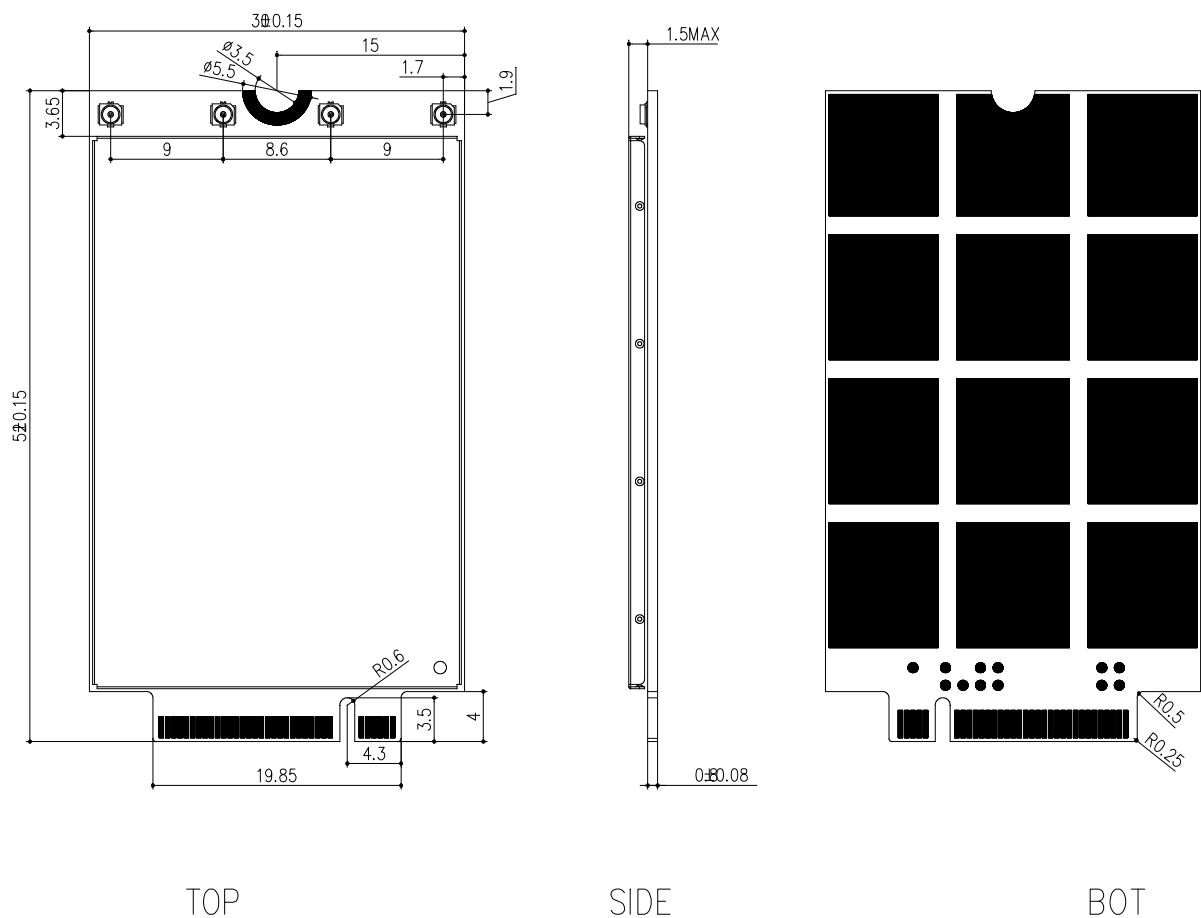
RM500Q-GL & RM500Q-CN Mechanical Dimensions (Unit: mm)
